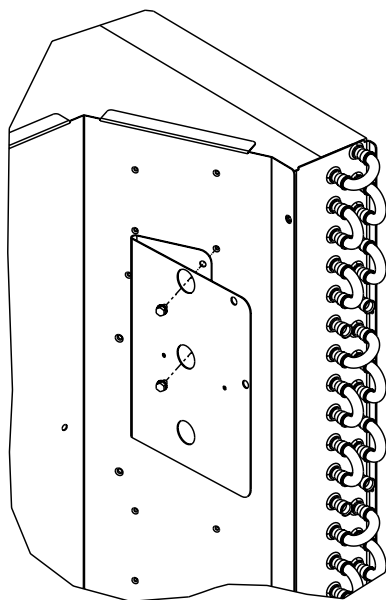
A - MOUNTING CONTROL BOARD SIDE DISCHARGE (AC)
